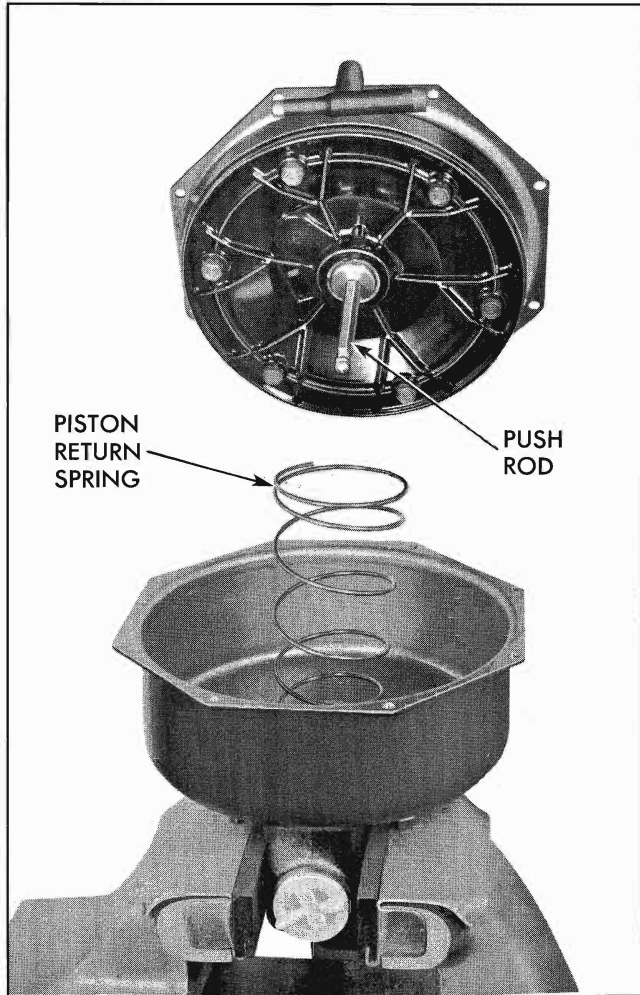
B-10 Separating Power Piston and End Cover from Vacuum Cylinder
